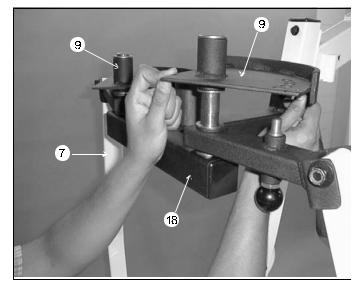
Mount the assembled Pec Dec Arms (#7) in Fig.11 to the Pec Dec Housing (#18) axles, as illustrated. Note: It is recommended that the Pec Dec Housing (#18) axles be lubricated with grease prior to assembly. Next, mount the two Pec Dec Cams (#9) onto the the axles of the Pec Dec Housing (#18), as shown above.
